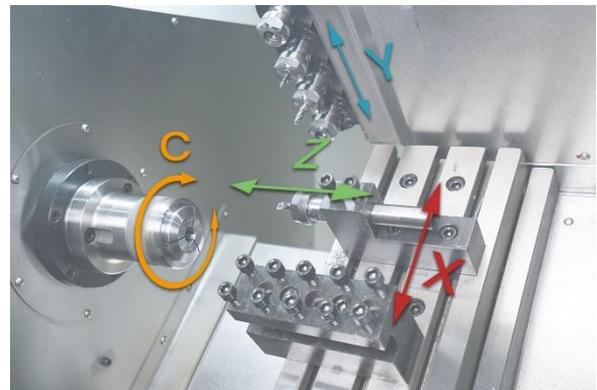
Four-axis lathe; X, Y, and Z translational axes & C rotational axis [3]
